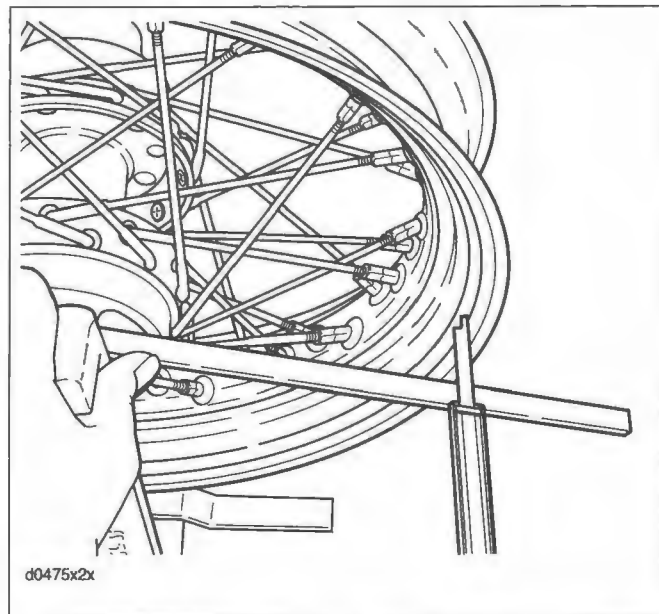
Check Laced Hub Offset Dimension (Rear Wheel Shown)
